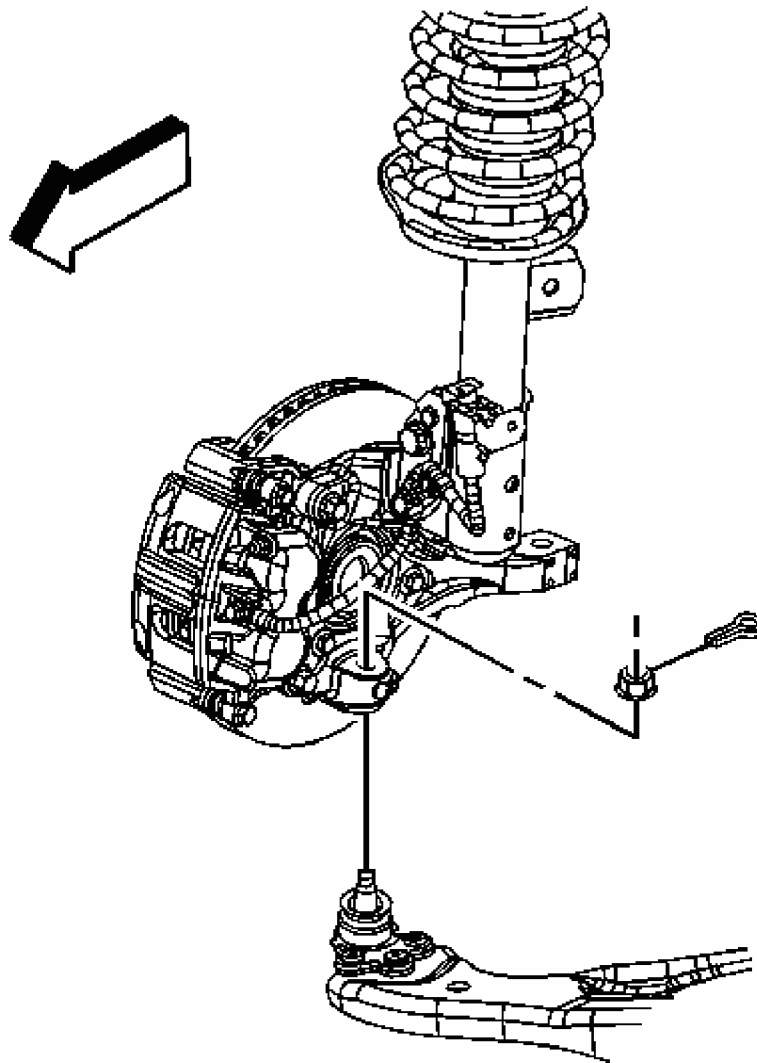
View Of Lower Ball Joint At Steering Knuckle
